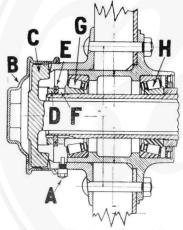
Sectional View of Rear Hub, Showing Bearings.
